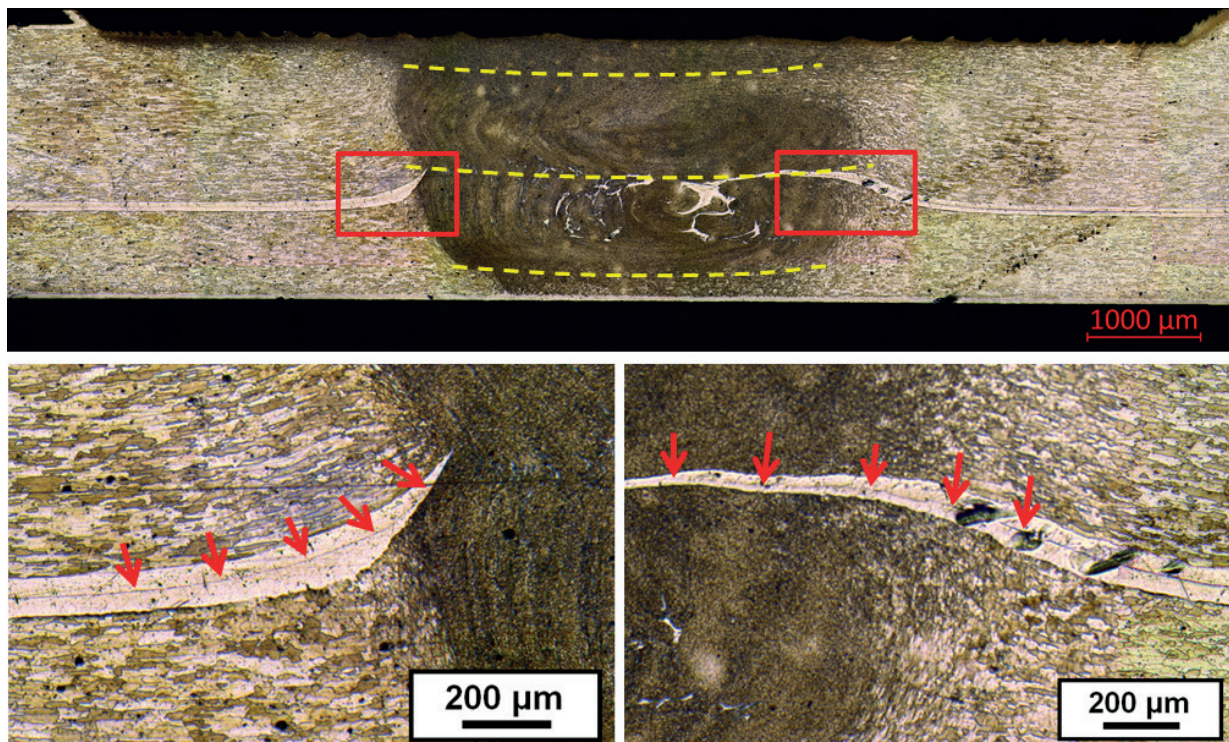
Microstructure of the joint welded according to the parameters: $\omega = 1300 \text{ rpm}$; $v = 300 \text{ mm min}^{-1}$; tool plunging in the lower sheet of 50%: a) total view of the weld cross section, b) contact line at advancing side, c) contact line at retreating side
